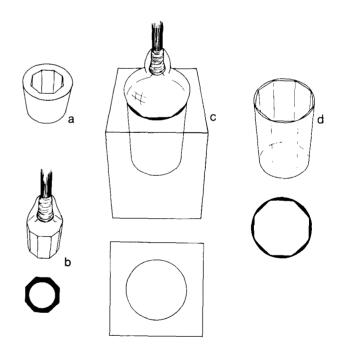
The process of optic moulding, based on Larsen, Riismøller, and Schlüter (1963: 389). (a) The part-sized mould with a pattern of panels. (b) The pattern-moulded parison. (c) The parison expanded in a smooth unpatterned dip mould. (d) Finished tumbler with the panel pattern on the inside of the object and a smooth exterior.
